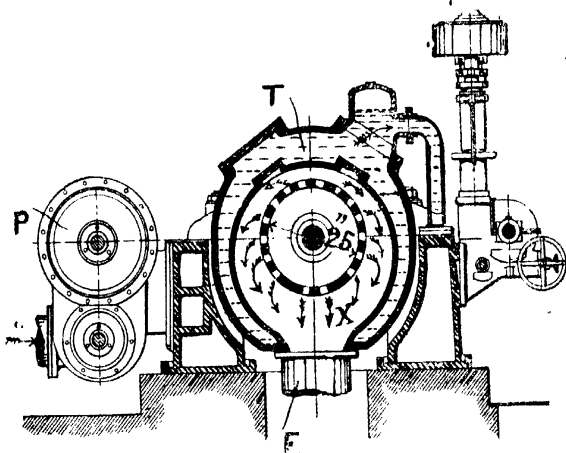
A.—Mid cross sectional view through cylinder of 500-h.p. double-acting gas engine, showing piston-controlled exhaust ports.
